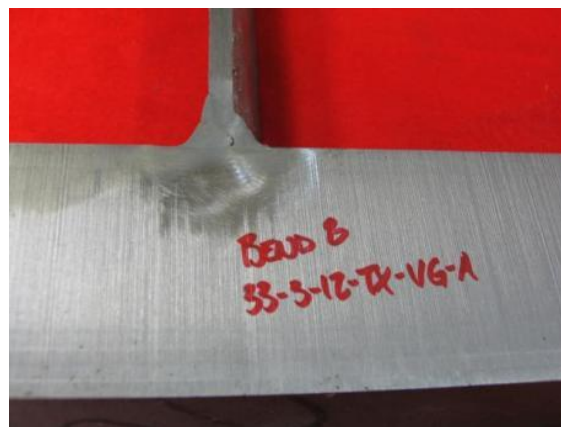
Cross Section of Full Penetration Weld without Collar
